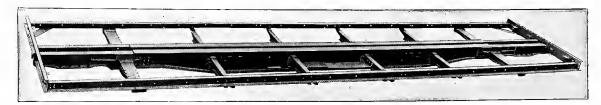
Steel Underframe with Double Center Sill Equipped with Cast Steel Ends. Builder, Bettendorf Axle Company.
